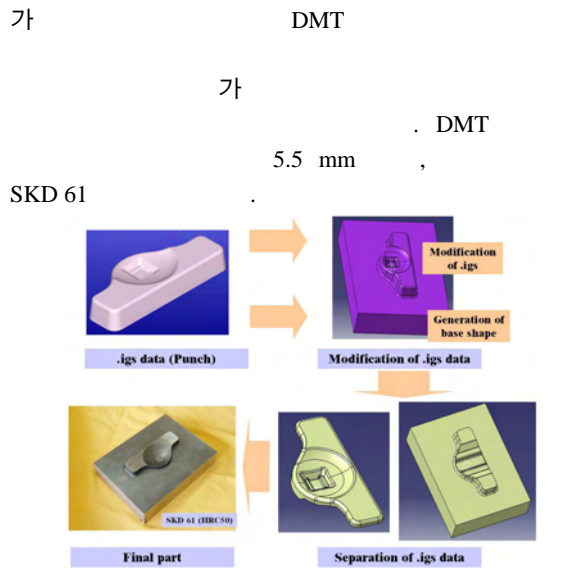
Manufacturing procedure of the punch using DMT and machining process
